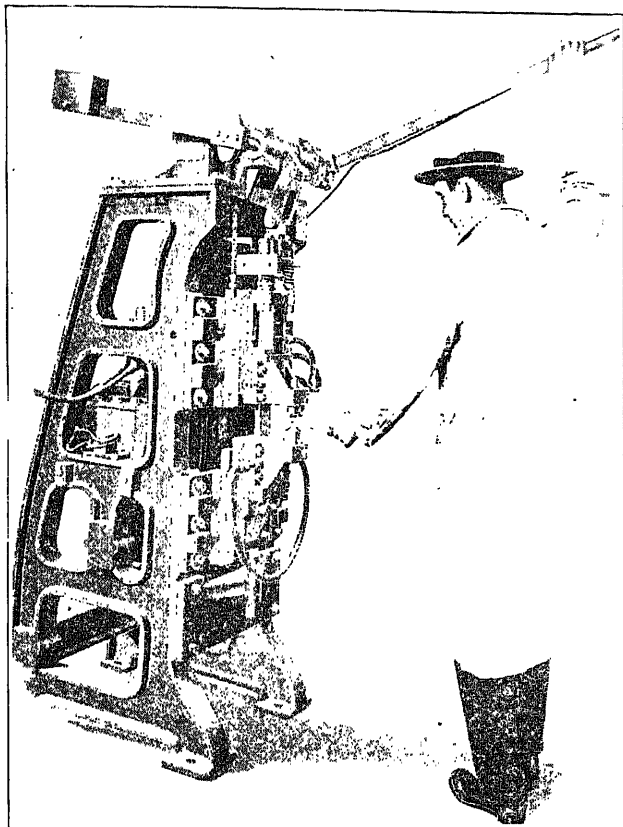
Making a "Mash" Insert Weld in a 20-AV Machine.
